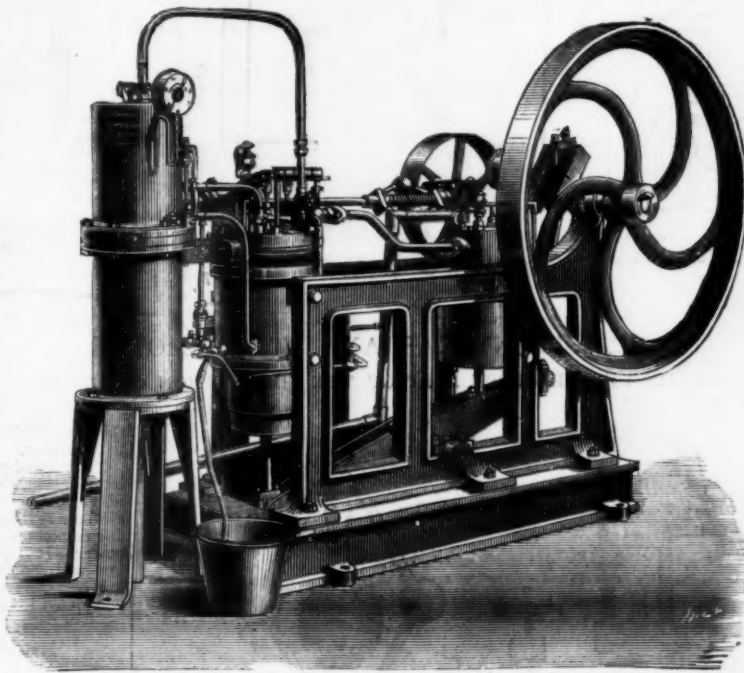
SIMON'S GAS AND STEAM MOTOR.
